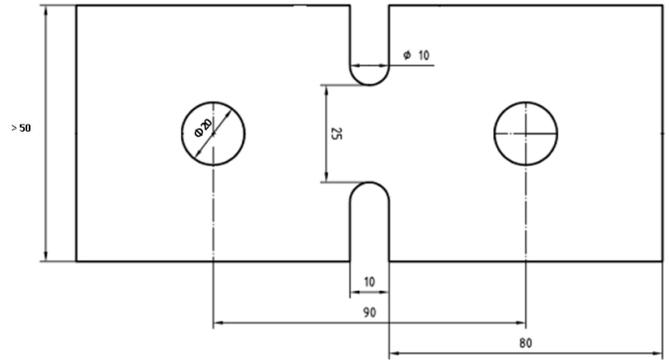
TYPICAL GEOMETRY OF WAISTED TENSILE TEST SPECIMEN, AS DEFINED IN EN 12814-7
